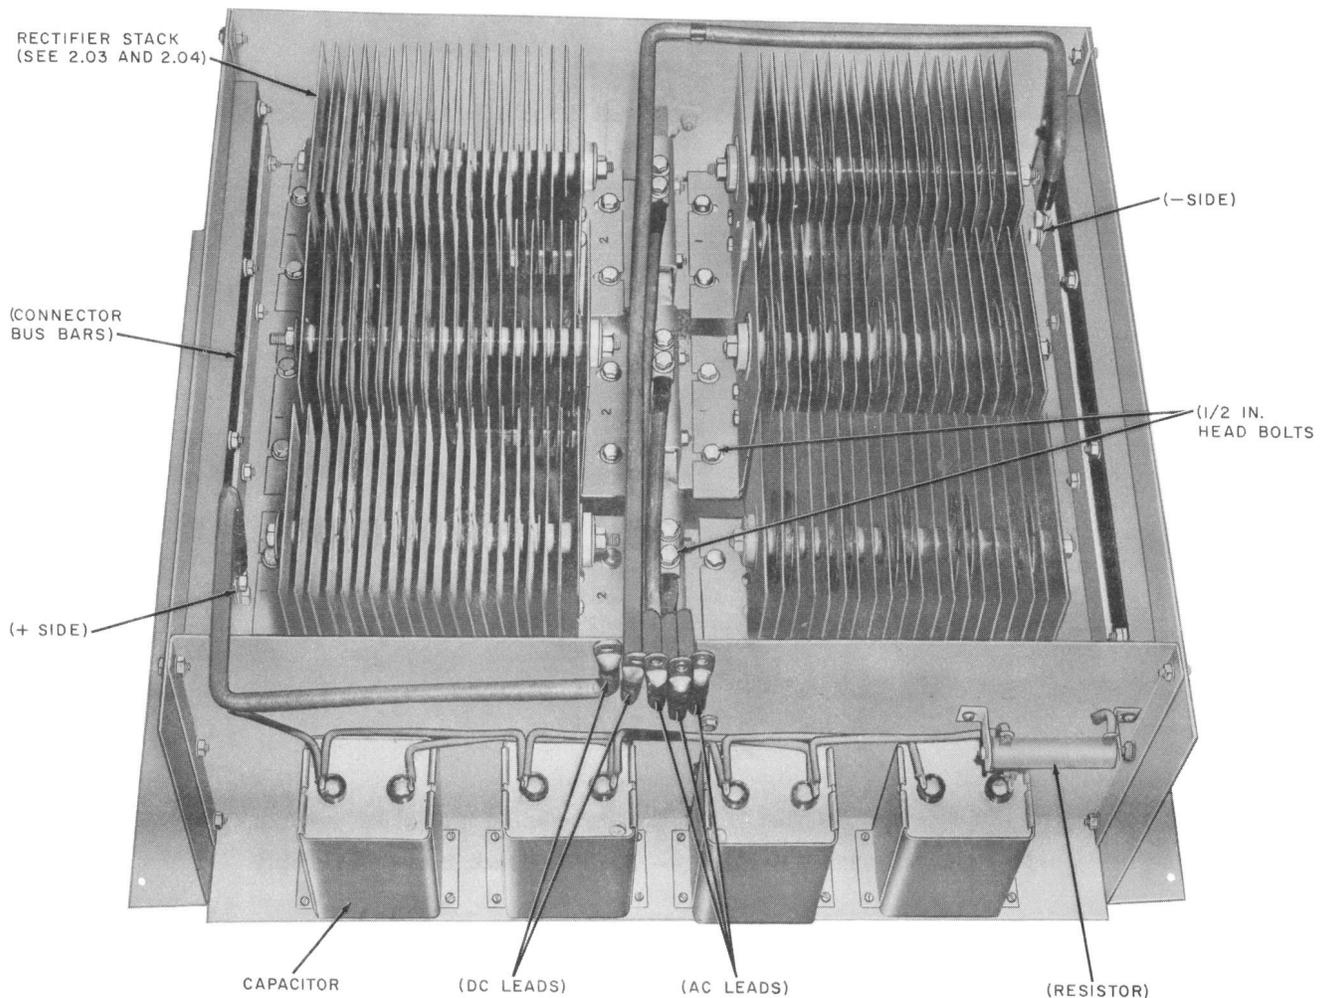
Typical Rectifier Stack Basket Assembly — Front View
